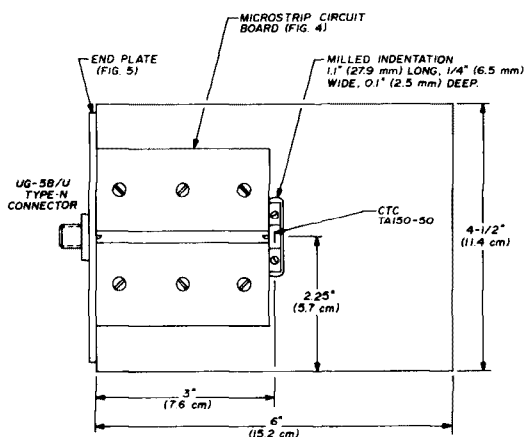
Heatsink layout for the 50-ohm 150-watt dummy load.
